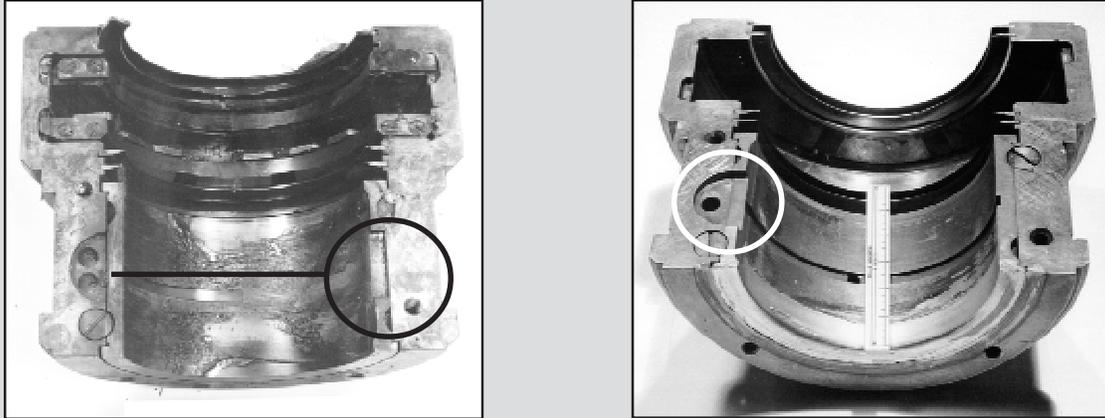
These two pinion bearing halves from *Kootenay* (left) and *Chaudière* (right) illustrate the difference between incorrect and correct assembly of the bearing inserts. In *Kootenay*'s starboard forward bottom-half bearing the insert is installed back to front such that the cut-out (black circle) to allow oil into the insert is opposite the lube oil inlet port at left. In *Chaudière*'s port forward top-half bearing the cut-out (white circle) is properly matched to the oil inlet.
